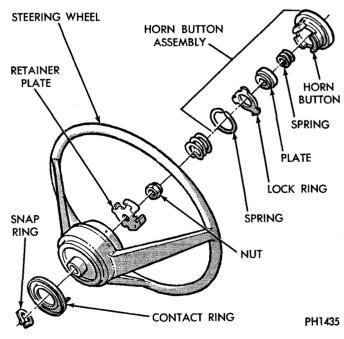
Horn Switch D500-600-700-800 W600, S600-700
